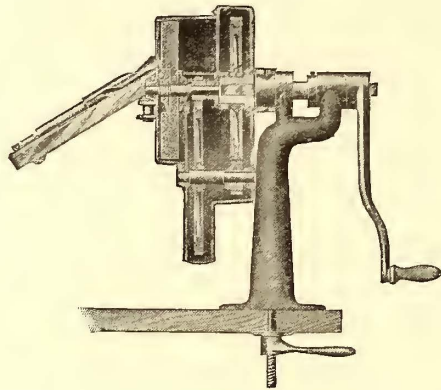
TOOL GRINDER MOUNTED ON IRON COLUMN
